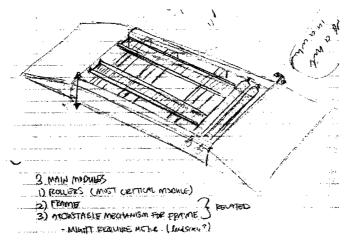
2nd concept design drawing - slightly more realistic concept design drawing outlining the main modules of the overall design.
